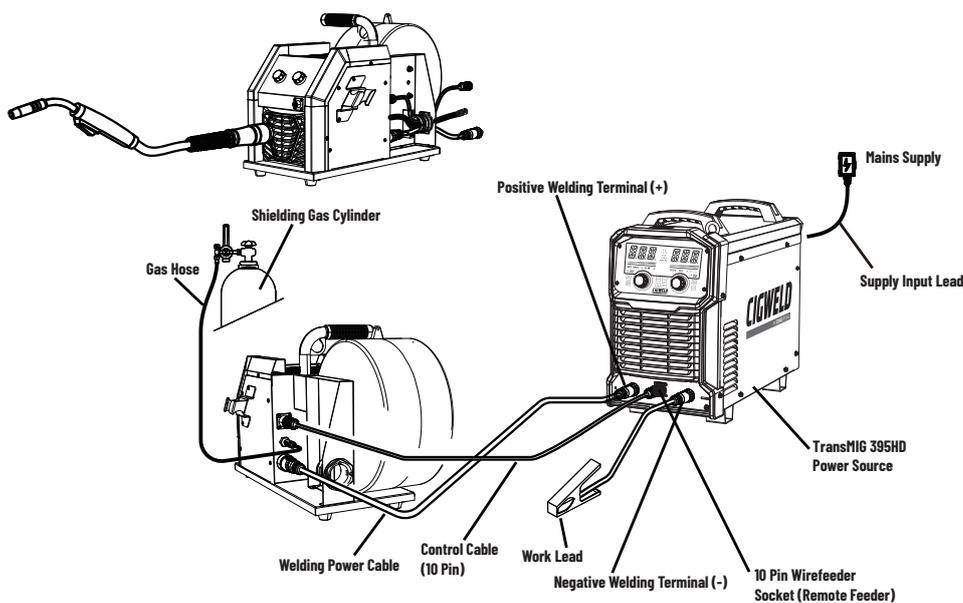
Setup for MIG Welding with Gas Shielded MIG Wire
